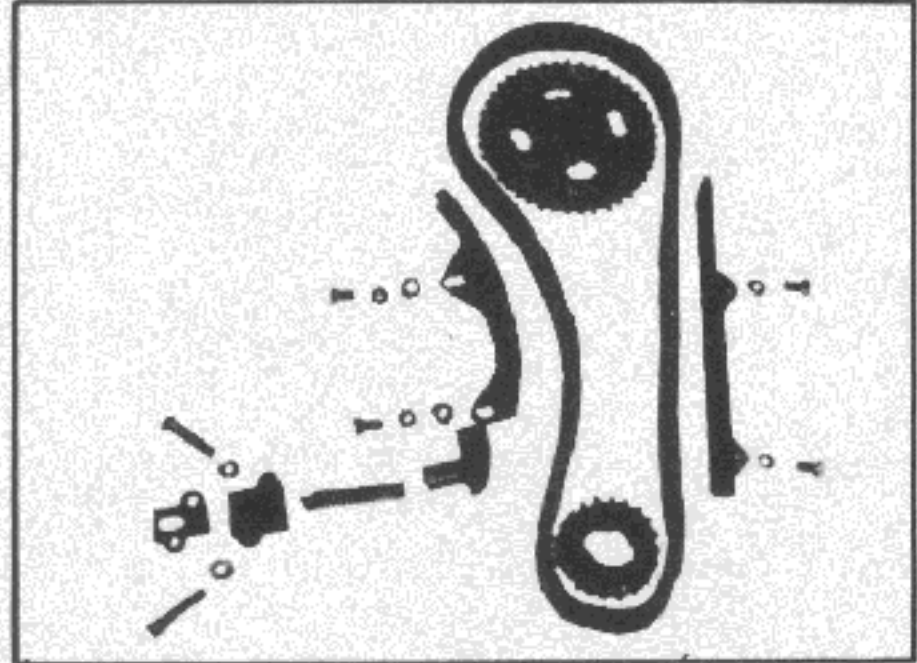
Camshaft drive mechanism for L13 and L16 engine
